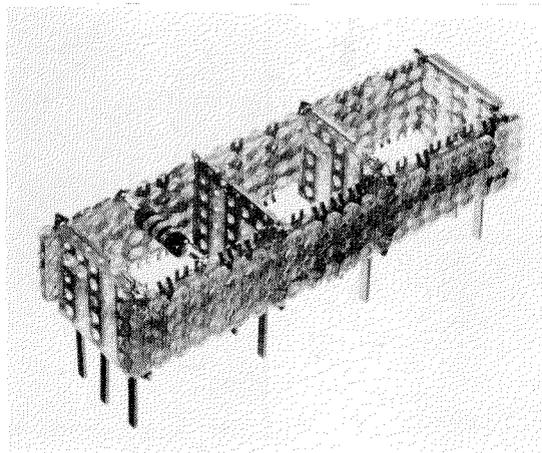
Two side-plate assemblies together with terminal plates make a frame for mounting components.
